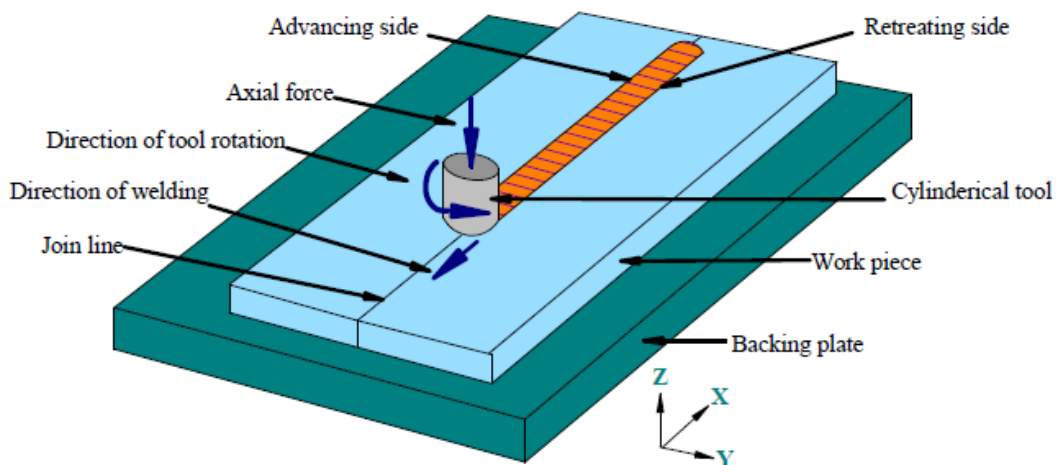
Schematic diagram of Friction stir welding process.
